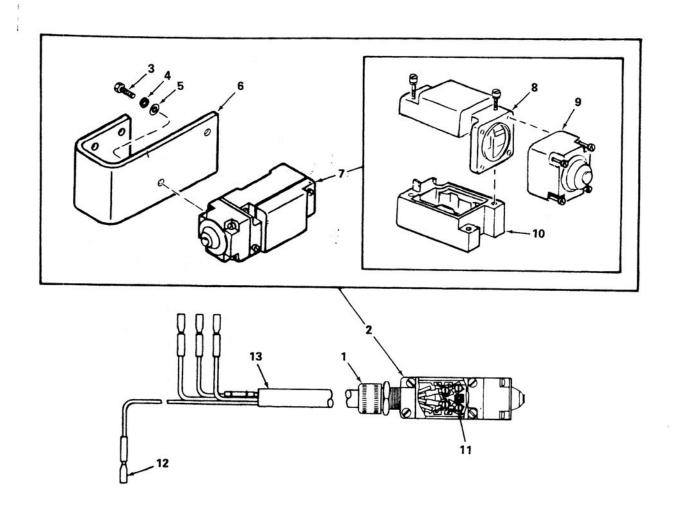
ELECTRICAL INSTALLATION, LAUNCHING RAIL /8167172/
